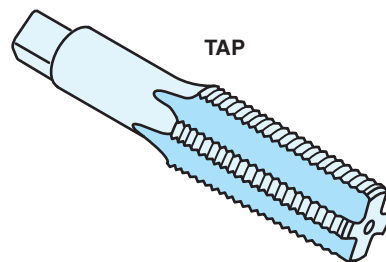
A typical bottoming tap used to create threads in holes that are not open, but stop in a casting, such as an engine block.
